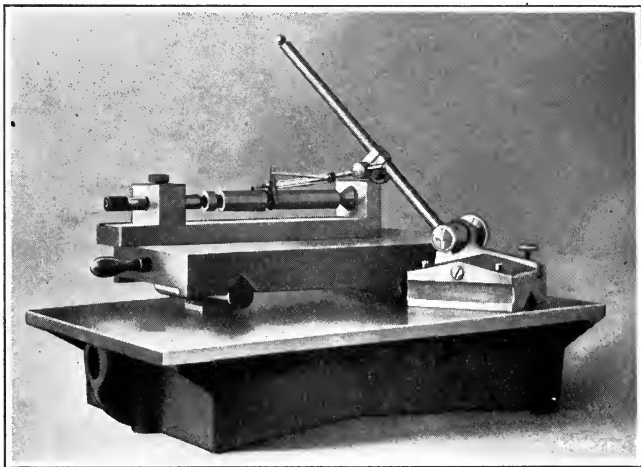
Illustration showing the Use of a Size Block and Sine Surface Plate in testing a Tapered Part
